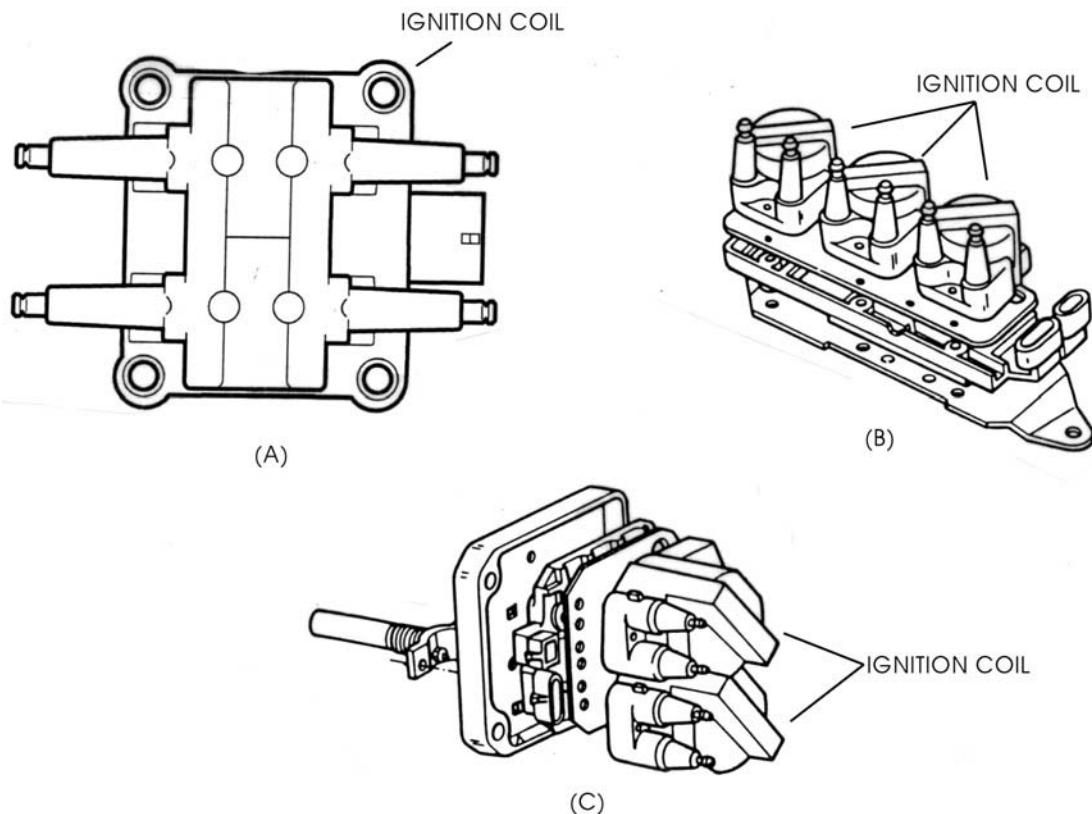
The ignition coil in Figure 59A contains one ignition coil for each of the four cylinders in the engine. The ignition coil pack shown in Figure 59B contains one ignition coil for each pair of cylinders in a six-cylinder engine. The coil pack in Figure 59C contains one ignition coil for each pair of cylinders in a four-cylinder engine. (59A Courtesy of Chrysler Corporation; 59B and C Courtesy of General Motors Corp.)
